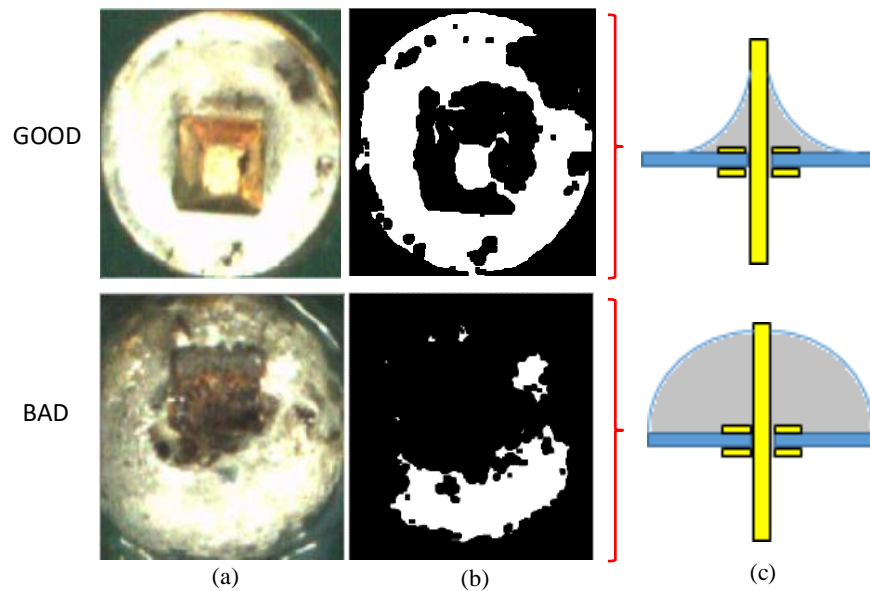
Comparison of the size of the connected region inside the resulted binary image with respect to shape of the solder joint for excess solder detection. (a) Solder joint. (b) Resulted binary image after the thresholding. (c) Cross section of a solder joint
